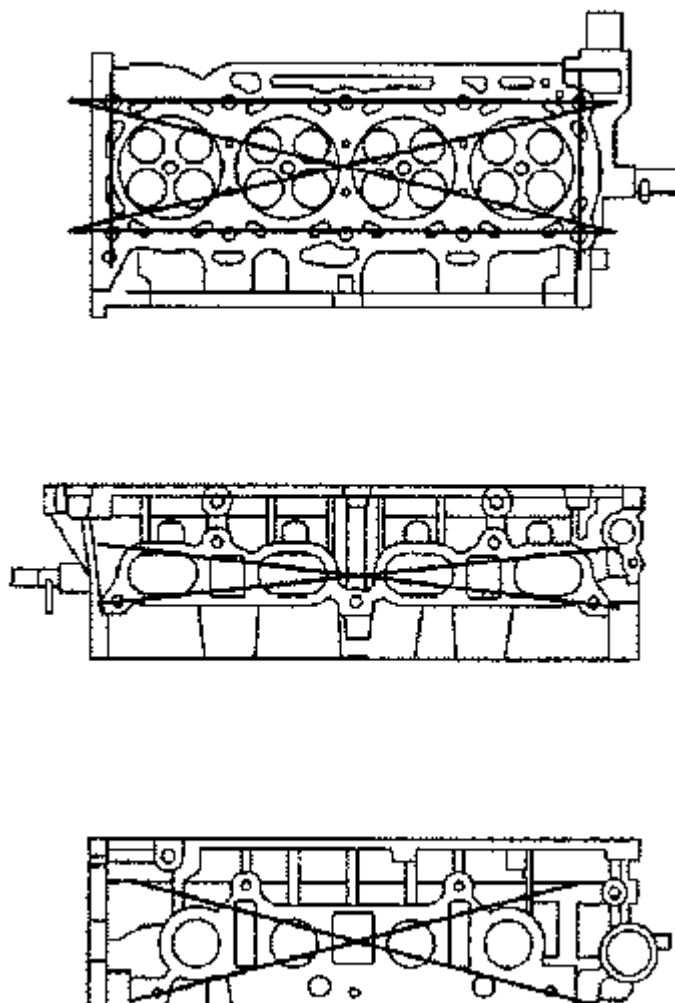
Inspecting Cylinder Head For Warpage
